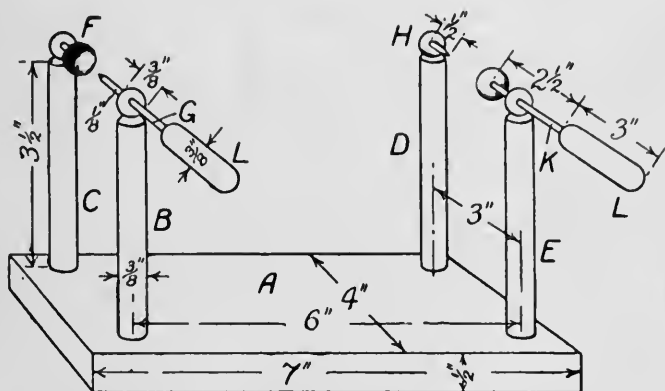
Spark-gap apparatus for use with a Wimshurst machine.
